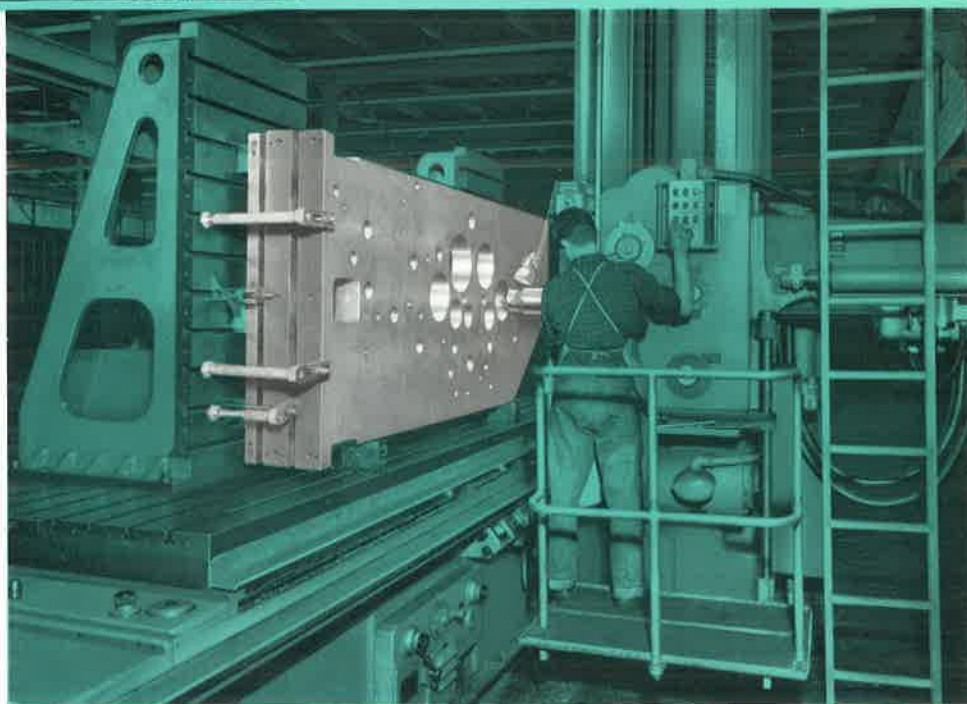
, below. Rough and finish milling, drilling and boring large cast steel traction gear box for diesel locomotive.
